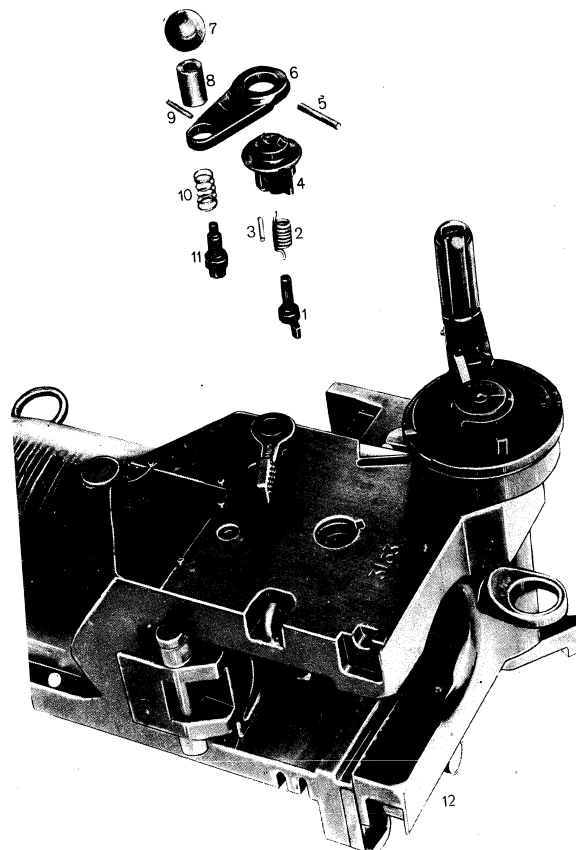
RECOCKING HANDLE - DISMANTLED
